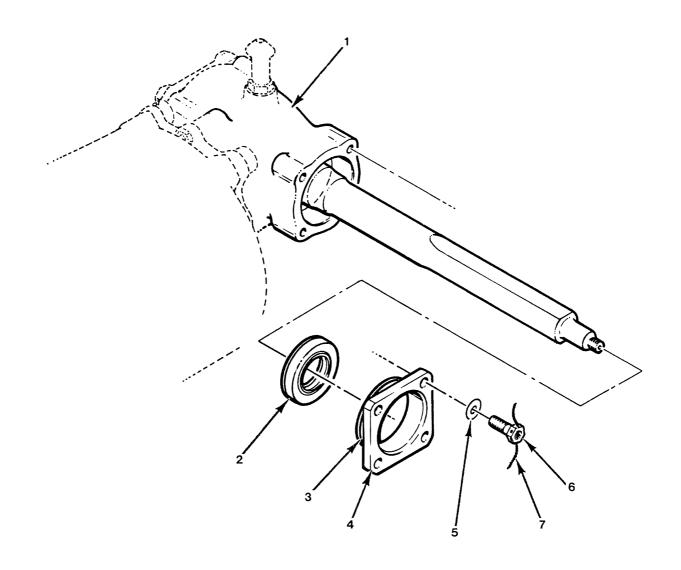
TAIL ROTOR GEARBOX OUTPUT SHAFT SEAL REPLACEMENT
